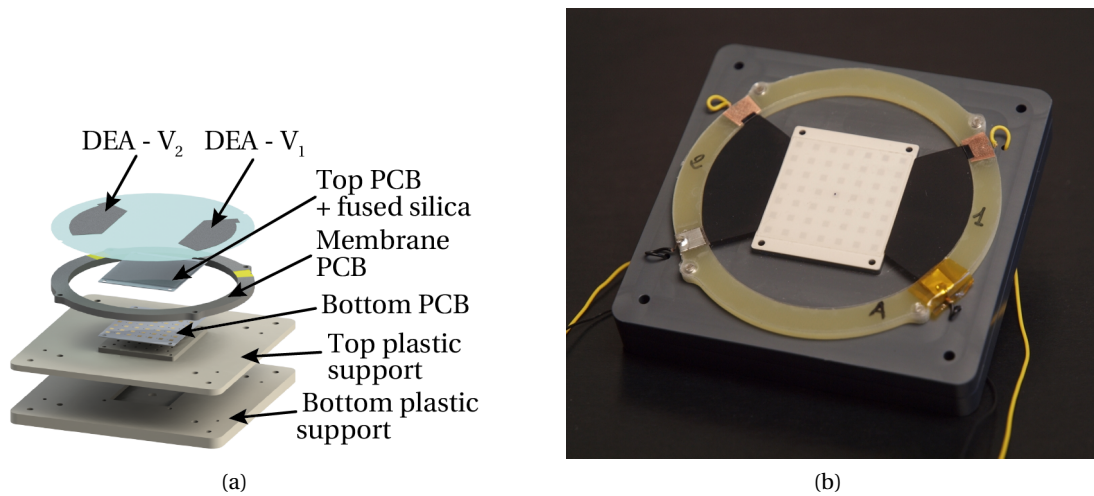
Optimized prototype of reconfigurable reflective surface based on dielectric elastomer actuation. (a) Render of the final device showing the air chamber needed to implement the vertical pneumatic actuation. (b) Picture of the device assembly including the connections needed for the control of the DEAs. Note the PDMS membrane is completely transparent in the picture.
